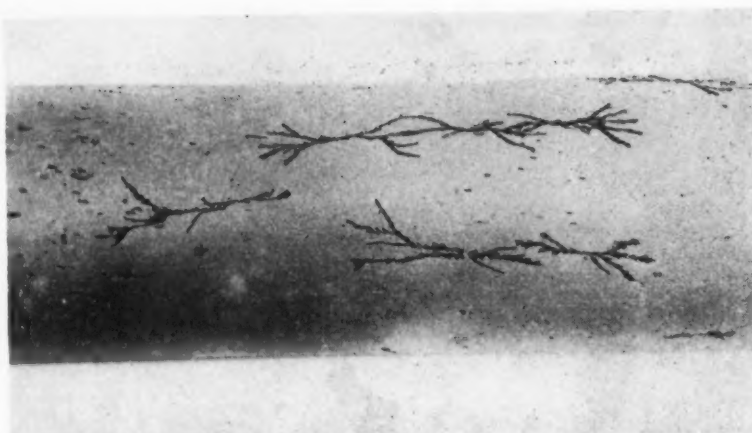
Stress-corrosion cracks on surface (not in the weld) of as-welded type 304L tubing show up as a Christmas-tree pattern.
